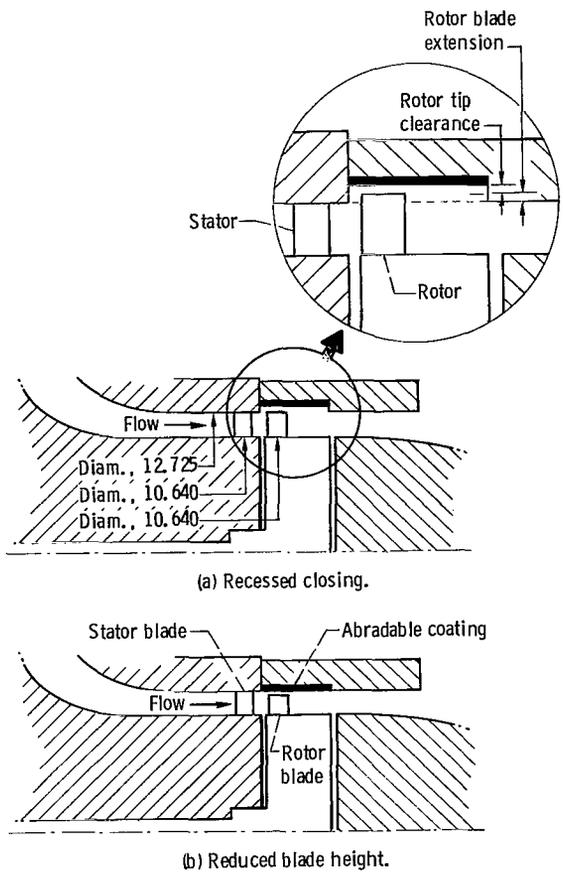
Schematic of tip clearance configurations investigated. (Dimensions in cm.)
